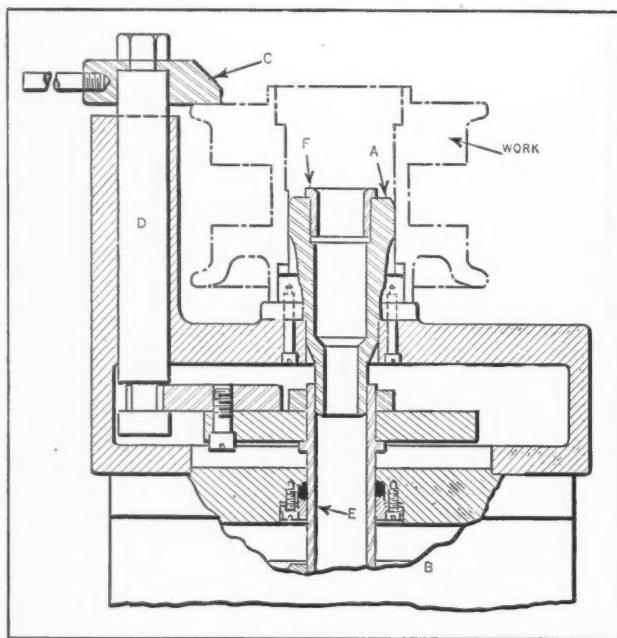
Fixture Designed for Holding Work in a Vertical Position
